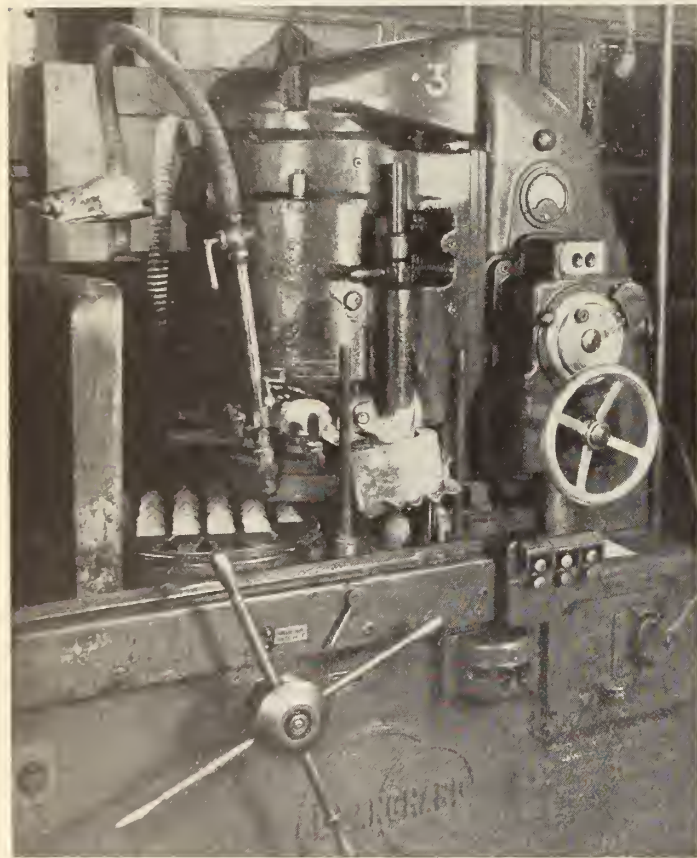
View of Blanchard vertical grinder set up for prism milling.
